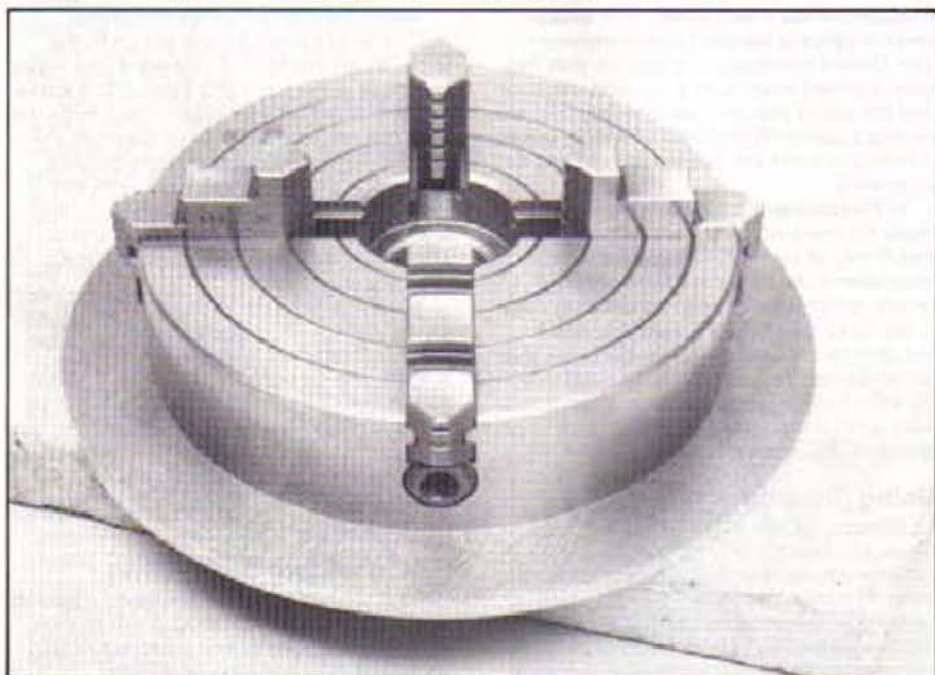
Positioning the six-inch chuck inside the heated brass ring.
